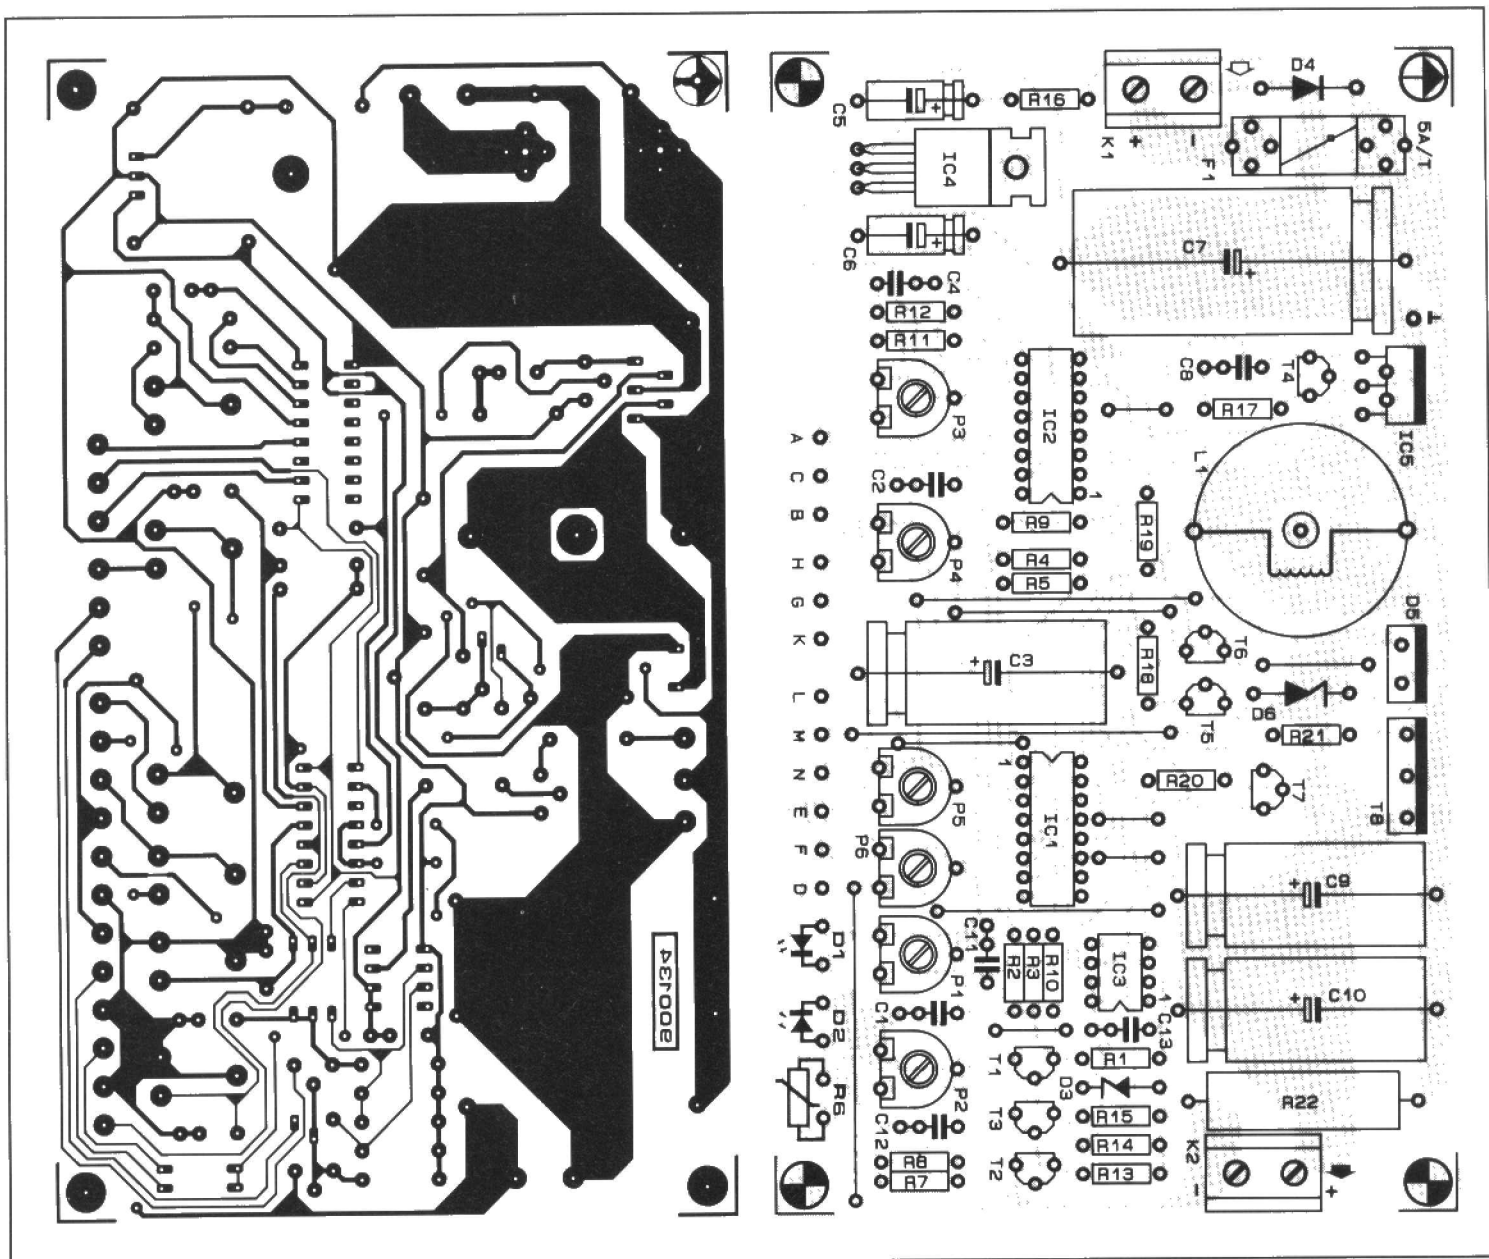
Component layout and mirror image of track layout of the printed-circuit board for the Ni-Cd battery charger.
